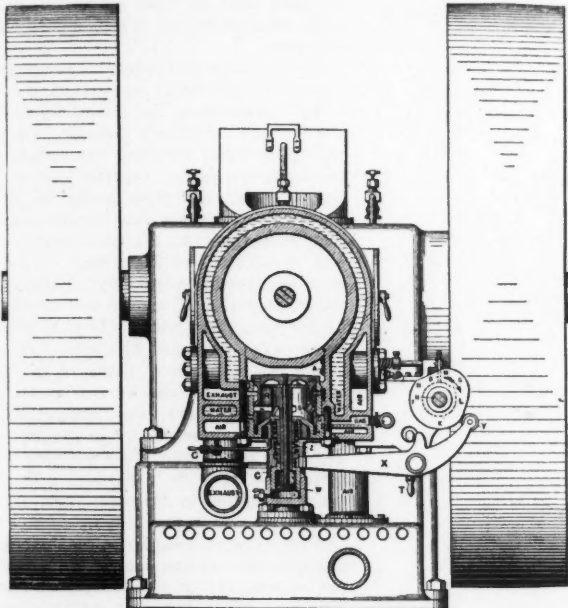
SECTION THROUGH CRANK-END VALVE.
